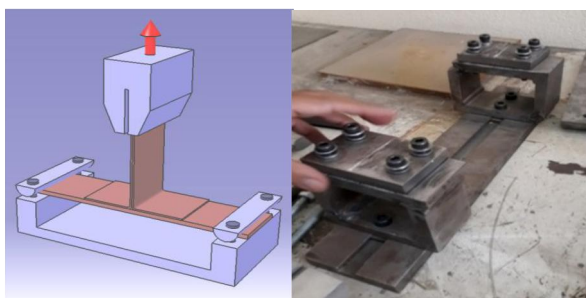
Schematic and fixture map made to perform tensile test [13]
